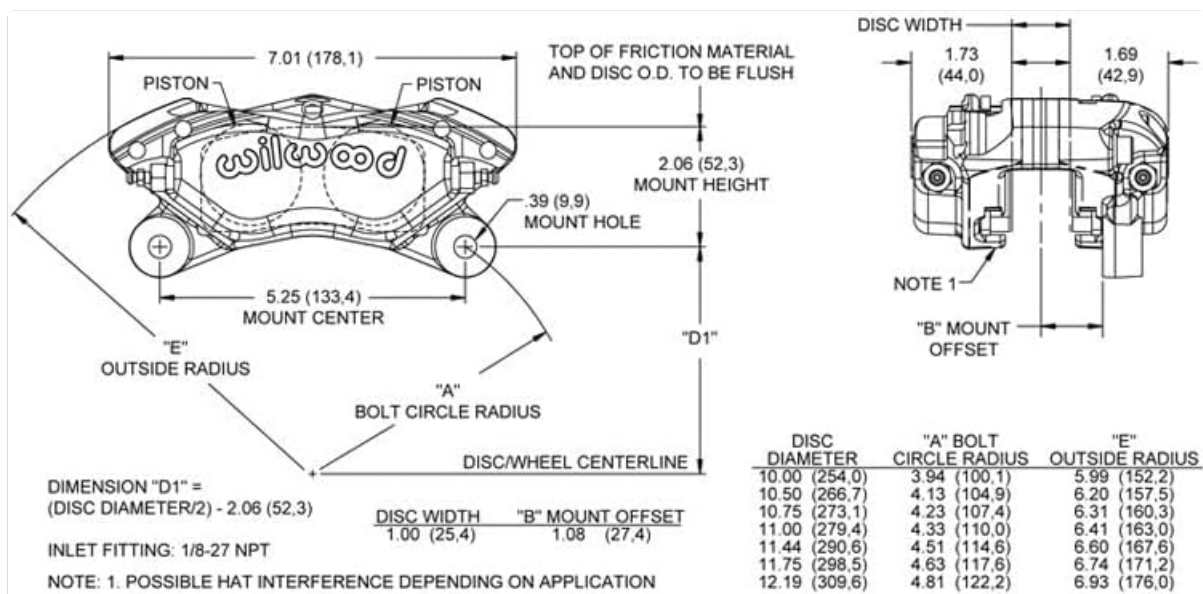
Technical drawing illustrating the dimensions and mounting points of the Wilwood Dynalite Caliper. This diagram provides critical measurements such as mount center, mount height, and bolt circle radius, essential for proper fitment and installation.
